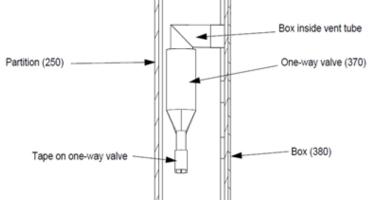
Detailed view one-way valve (370) location and clearance for handling.
